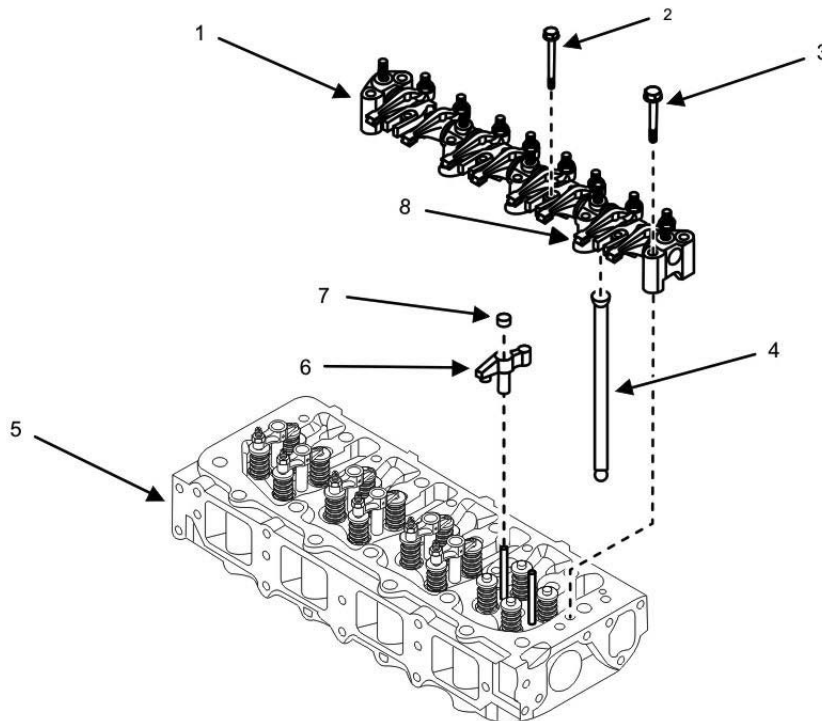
Rocker Arms and Push Rods — Removal Detail.
